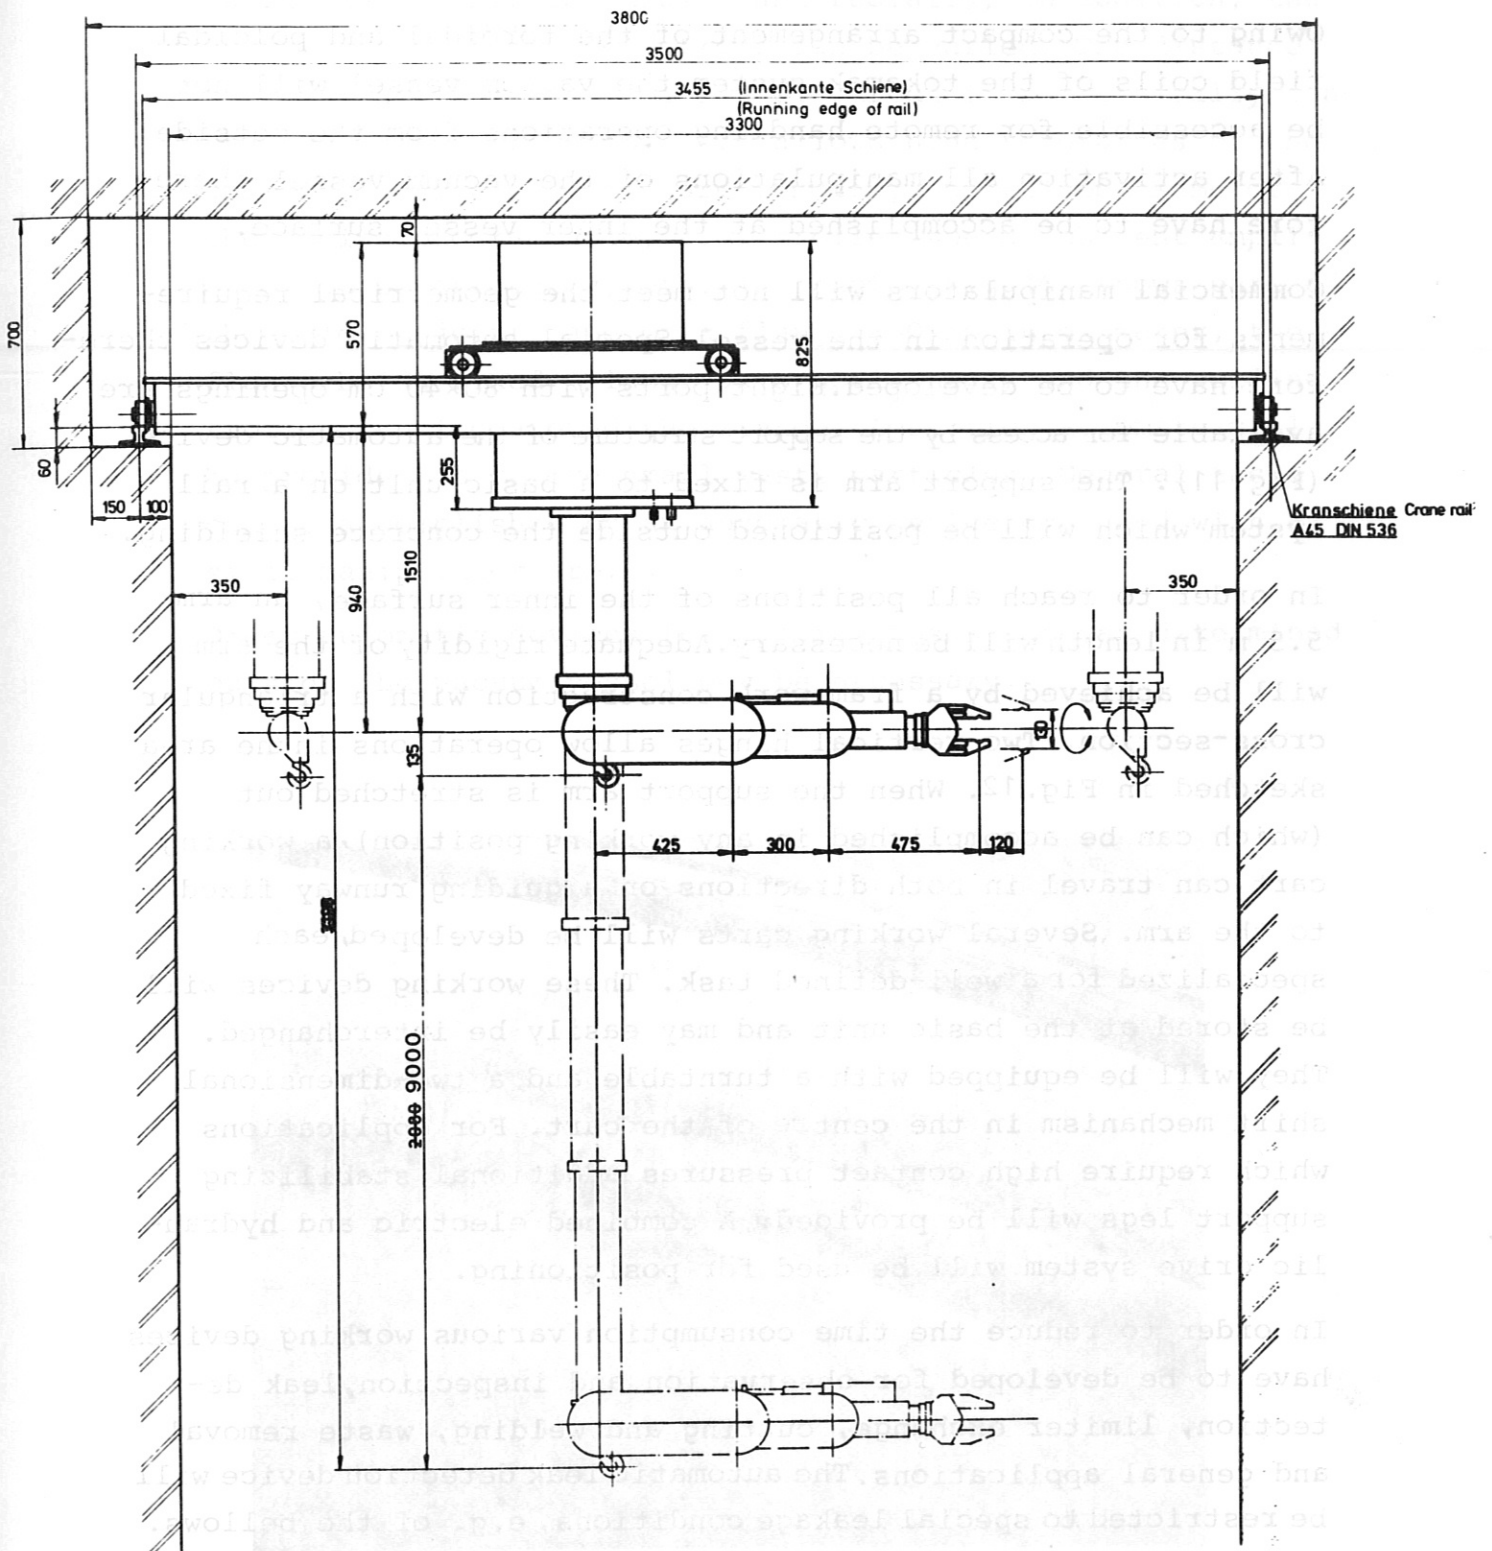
Heavy load manipulator A1001 (Wälischmiller)
